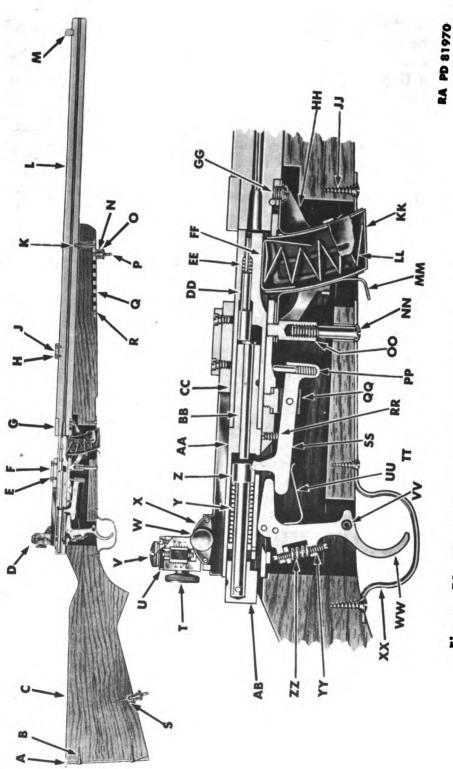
Stevens Ritle, Cal. .22, Model 416-2 — Sectional View
